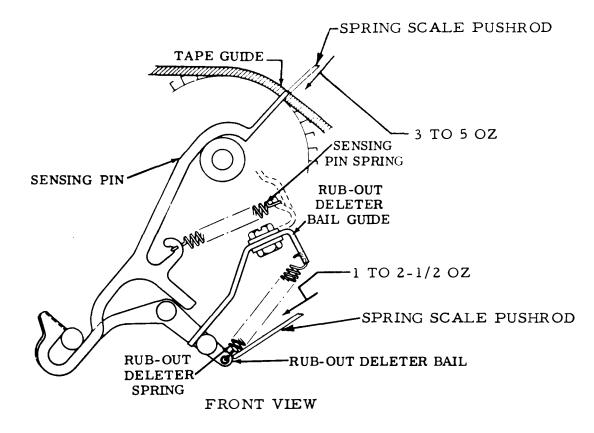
Sensing Pin Spring and Rub-Out Deleter Bail Spring
